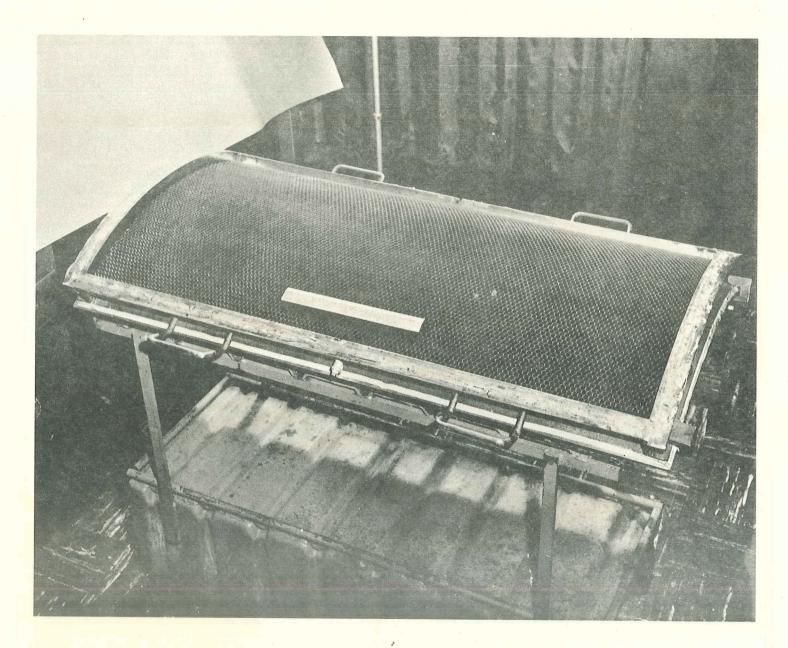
Curved Panel Loading and Cure Form With Honeycomb - Face Sheet Assembly In place for Loading
